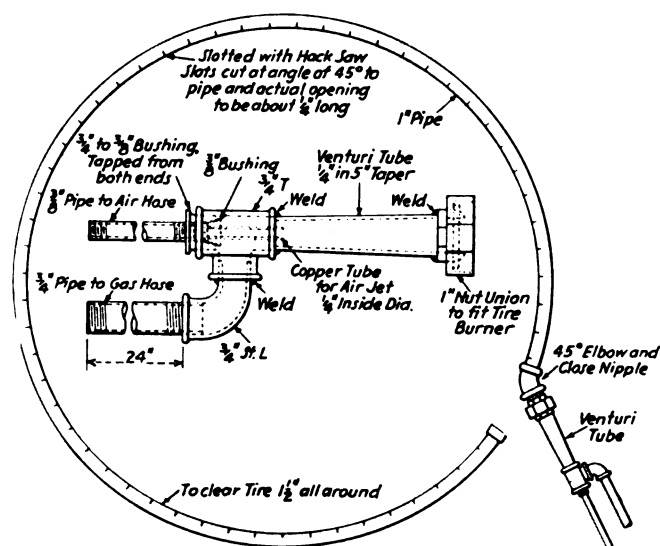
Tire heater for burning gas, showing details of the air injector and the gas mixing tee
